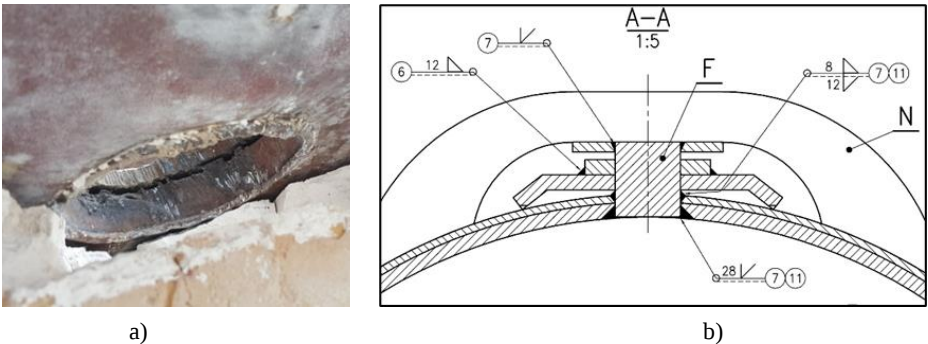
View of sub-welding in pin used for the duct attachment. (a) Actual image, (b) Project
